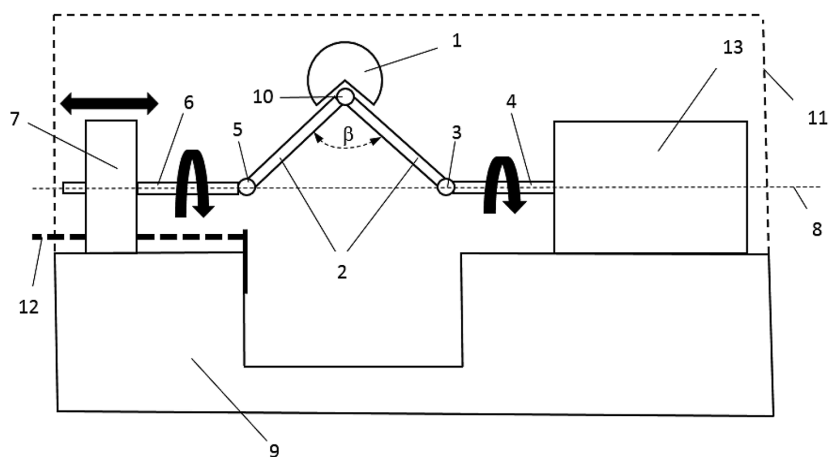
Inertial vibrator with mechanically regulated exciting force; explanations: 1 – load, 2 – double lever, 3, 5, 10 – joints, 4, 6, 8 – motor shaft, 7 – bearing casing, 9 – base, 11 – housing, 12 – screw
